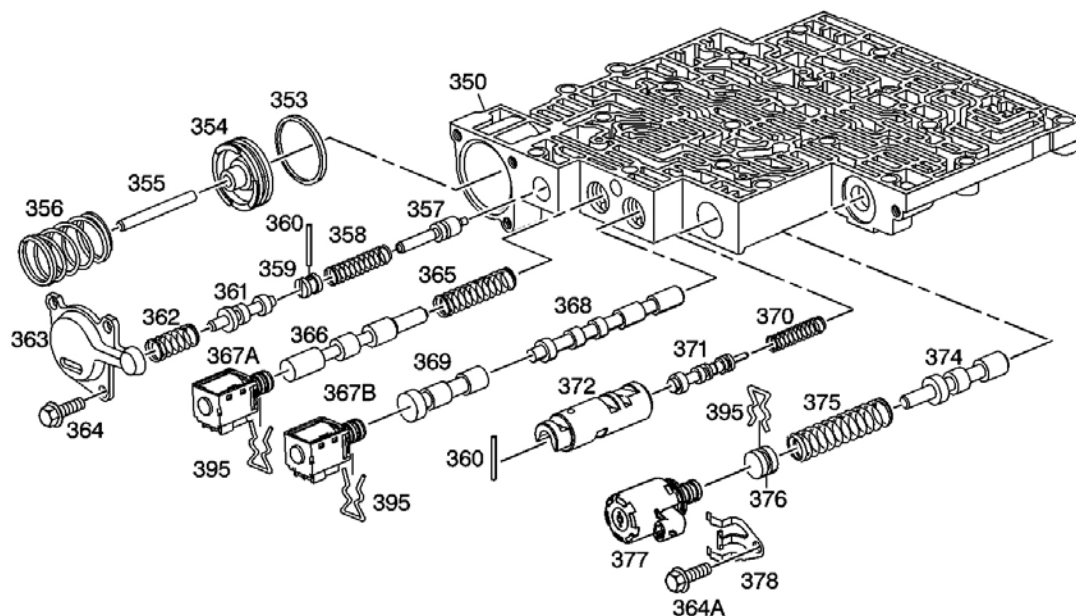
Control Valve Body Assembly Disassembled View (1 Of 2)
